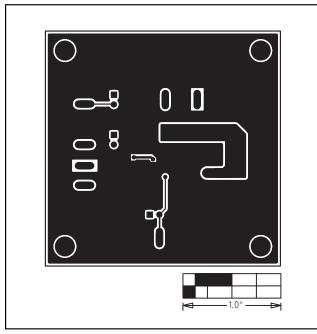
MAX8506 EV Kit PC Board Layout—Solder Side
